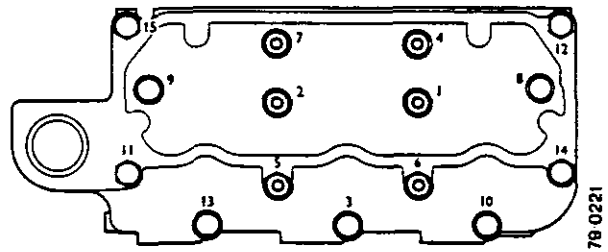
CYLINDER HEAD TIGHTENING SEQUENCE
